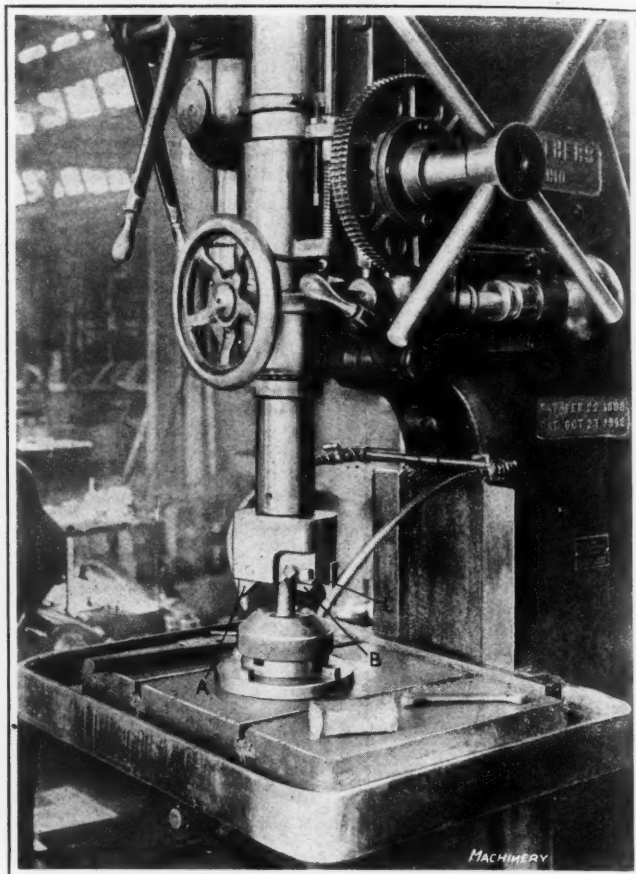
Close View of Tools and Work-holding Fixture for forming Bevel Gear Blanks on Baker Bros. High-duty Drilling Machine
